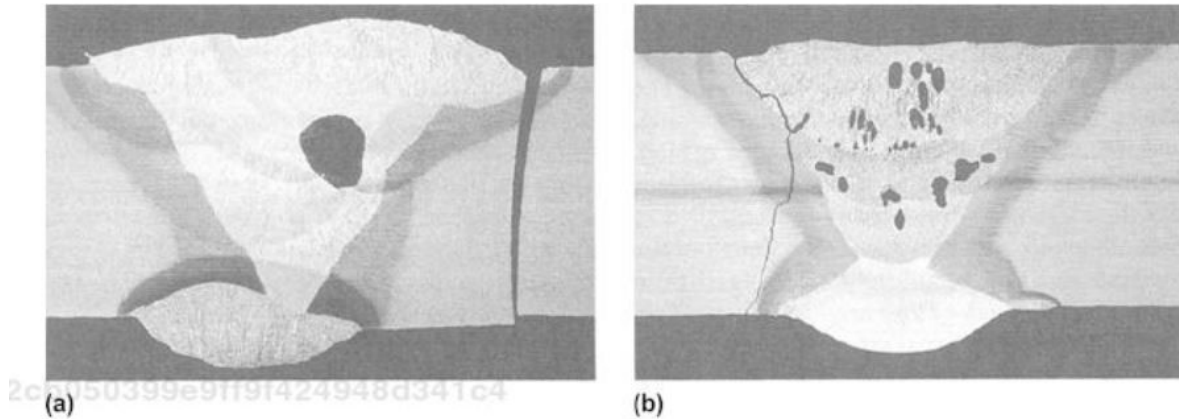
Effect of volumetric defects on fatigue: (a) slag inclusion in the butt weld, and cracking from weld toe; (b) porosity in the butt weld, and cracking from weld toe. (Campbell 2010, 127.)
